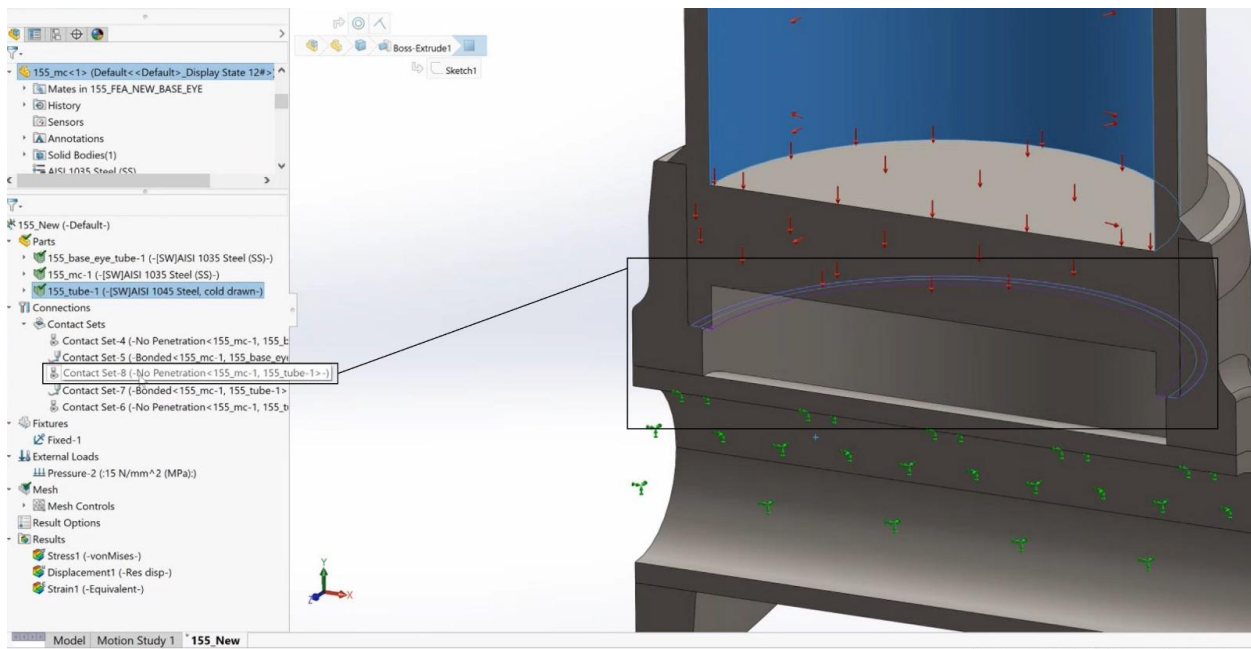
The contact type “no penetration” between the bottom end of the cylinder barrel and the inner part of the base eye
